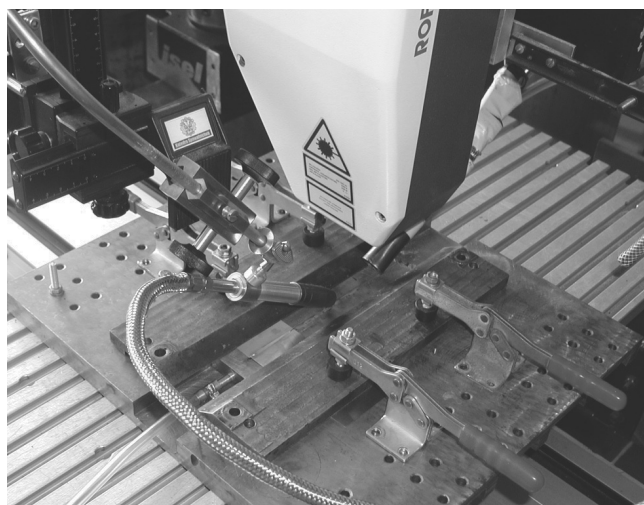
A view of the experimental setup with the HPDL ROFIN DL020 laser head and clamping system used for welding the butt joints of titanium alloy Ti6Al4V 1.5 mm thick (Table 3)
